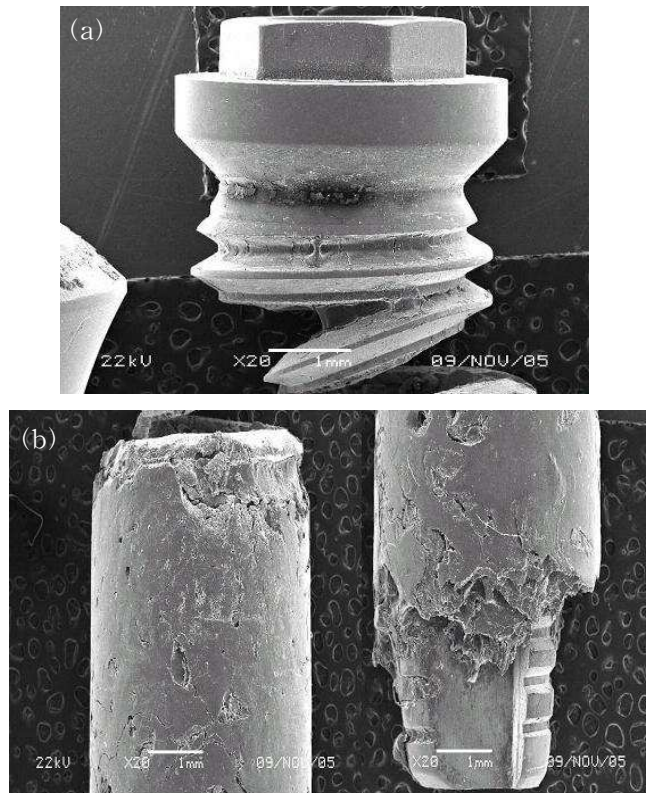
SEM showing the fractured pattern of 33 month used fixture.
